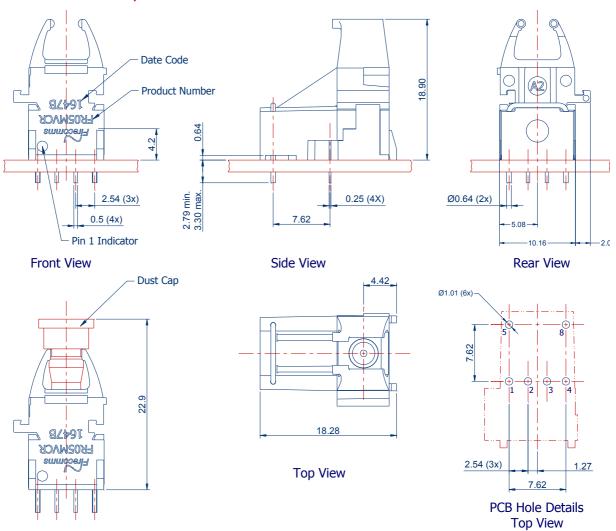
Mechanical dimensions of the horizontal connectors and PCB footprint, which is a top view General dimensional tolerance is $\pm\,0.2~\text{mm}$
